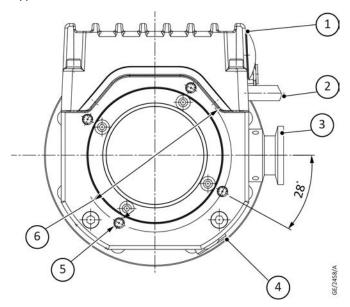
Dimensions - nEXT55D CF63 NW16 80W
